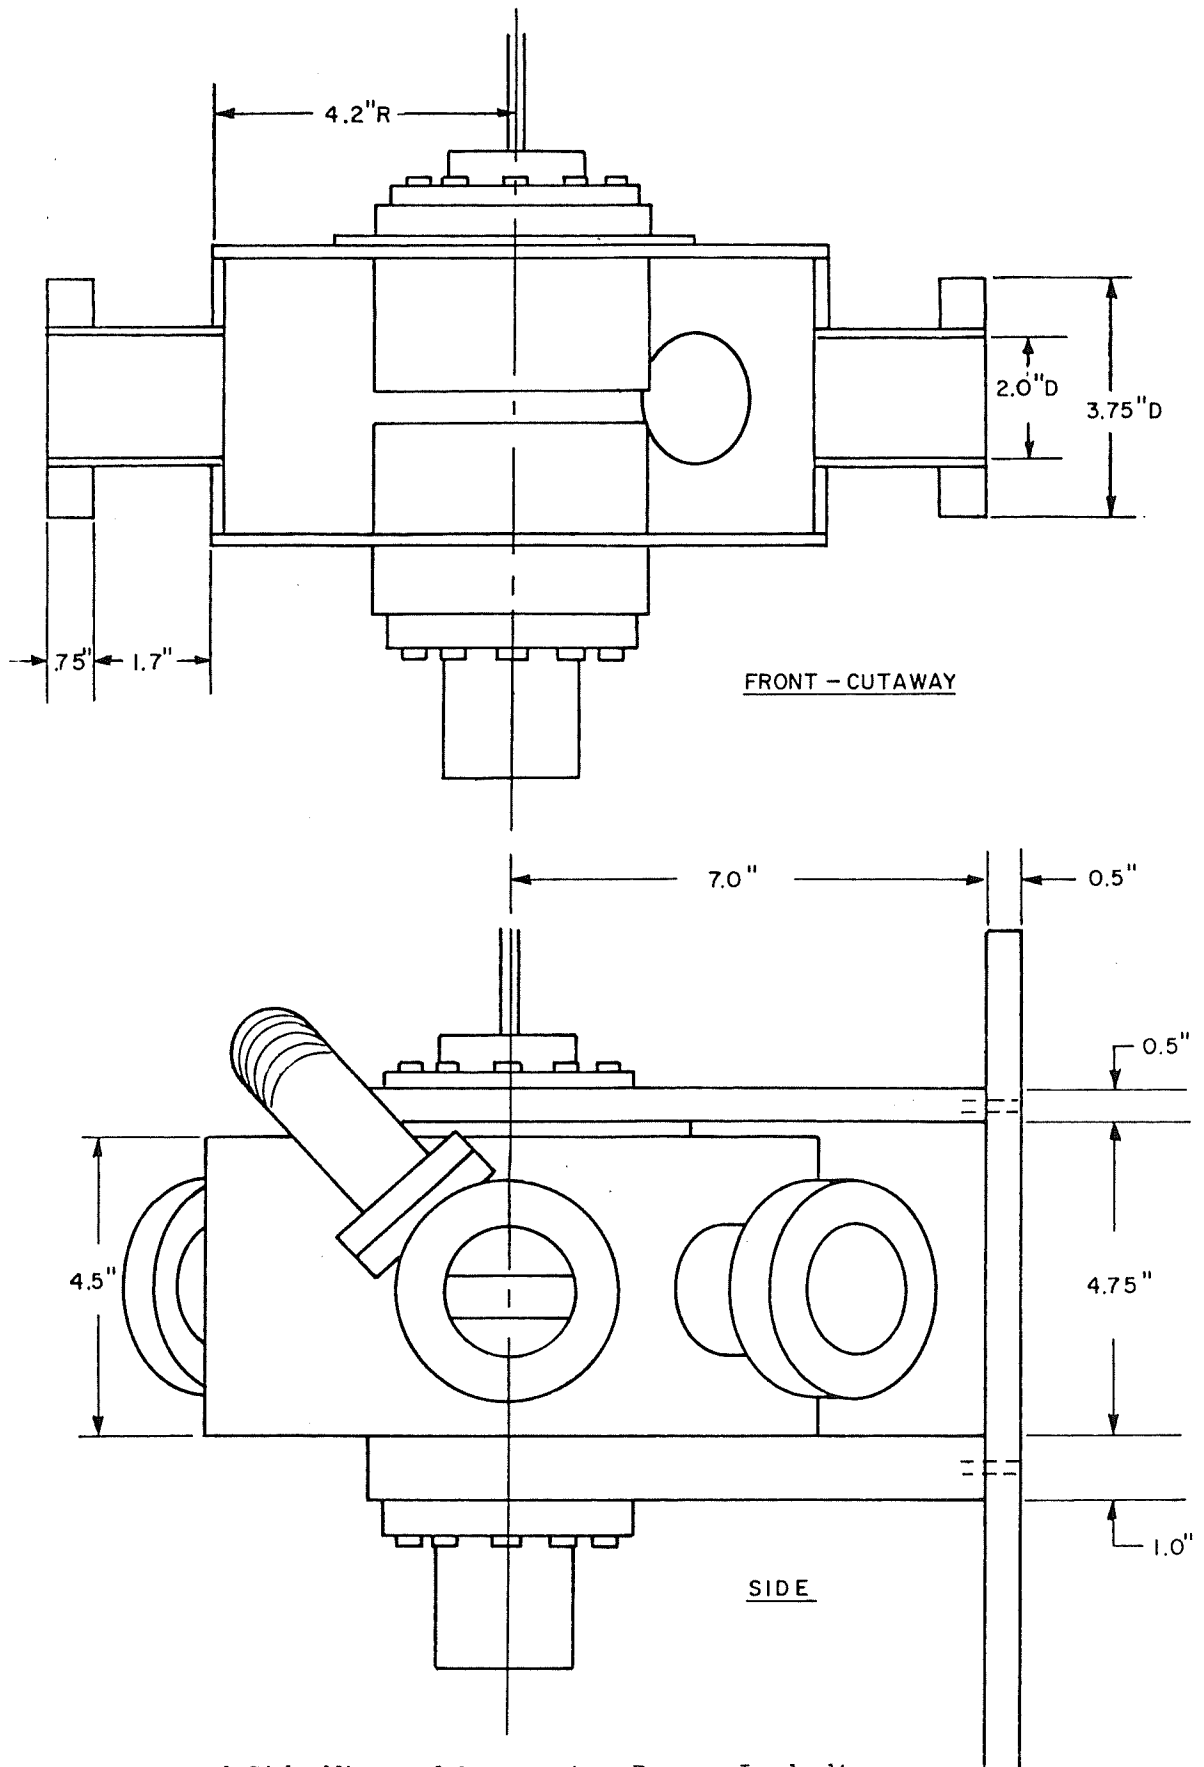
Front and Side View of Stagnation Burner Including Mounting System.
